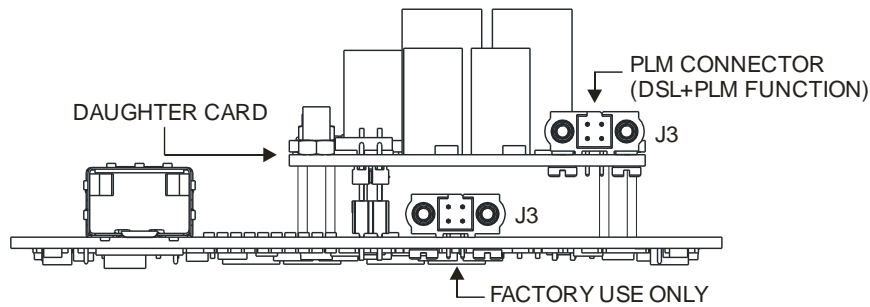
Carrier Card with Daughter Cards (Front View)
